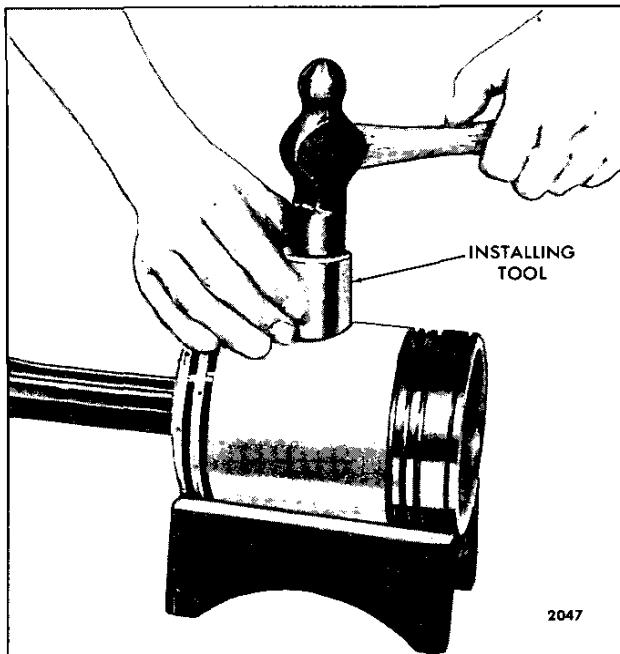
Installing Piston Pin Retainer Using Holder J 1513-02
